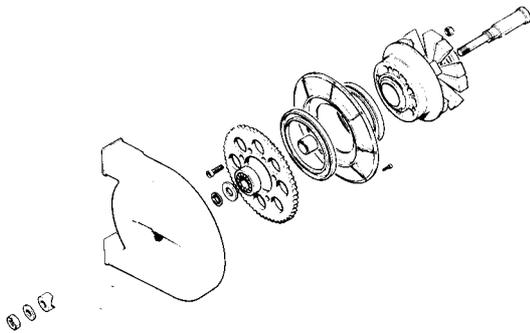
Replacing the Rear Wheel Drive Sprocket.
